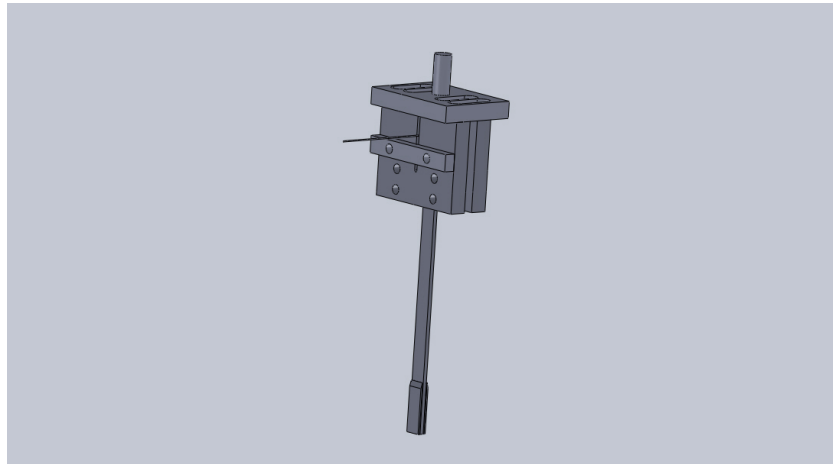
Solid drawing of the special fixture with a specimen
